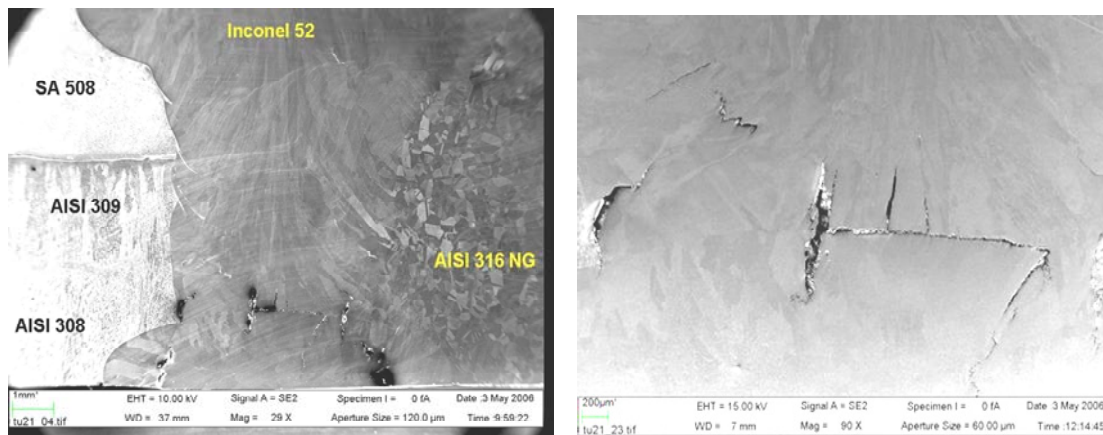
Cross-section of the mock-up 2 weld after Vareststraint test showing extensive liquation cracking.
